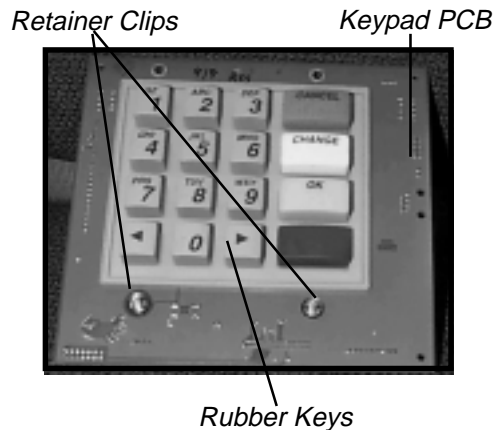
Retainer Clips Installed on Bottom Keypad Mounting Screws.
